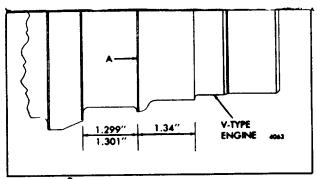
Standard Dimensions at Rear Main Bearing Thrust Washers and V-Type Engines
